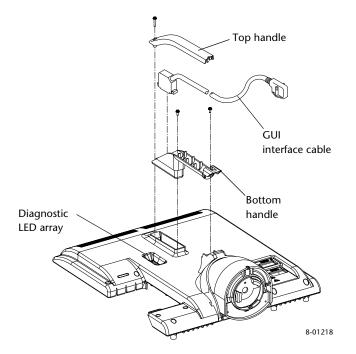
Removing and replacing 10.4-inch GUI cable assembly
